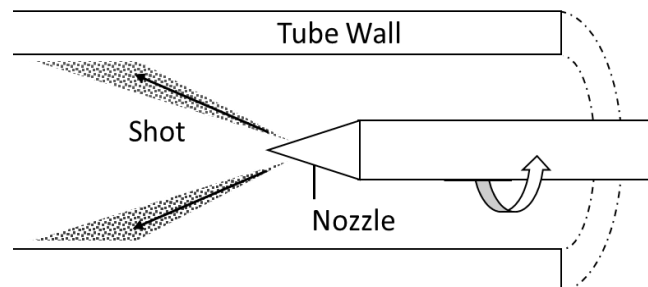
The shot peening process for a steel tube. The nozzle is moved over the tube surface and rotated as it sprays the shot.
